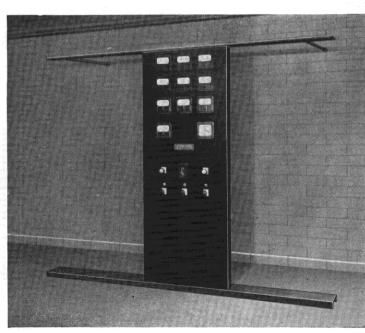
Correct Method of Assembly, Aligning and Bracing Switchboard Panels.
